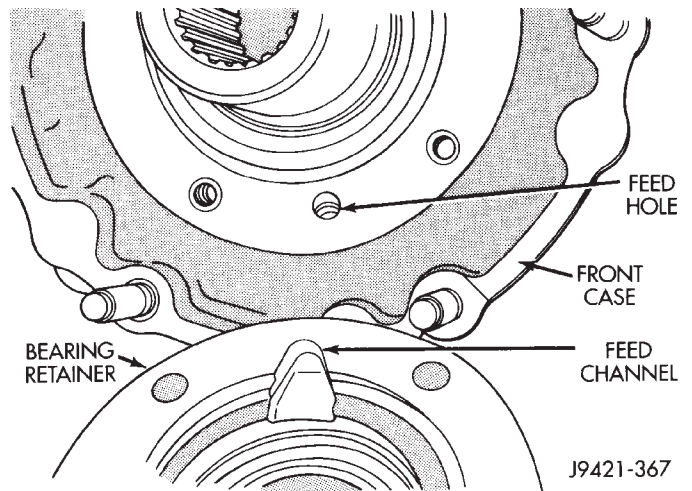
Aligning Retainer Oil Channel With Feed Hole In Case
